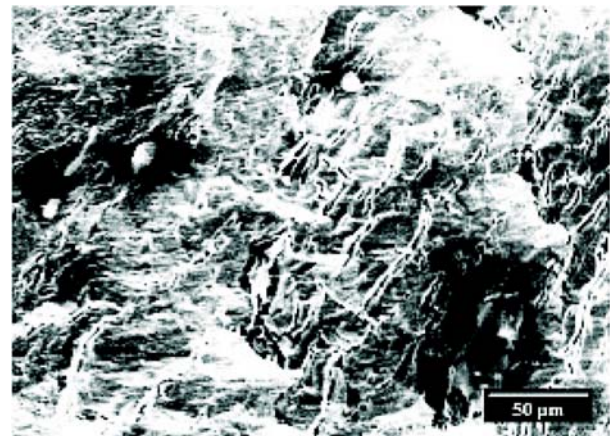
Cluster of sulphides in fracture surface, specimen No. 4759-16
